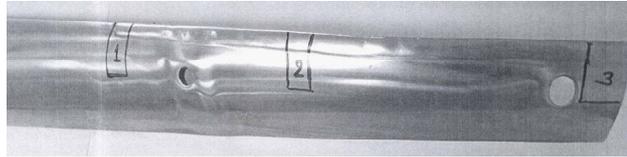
Layout of the blade that was sent for testing with tagged for cutting templets
